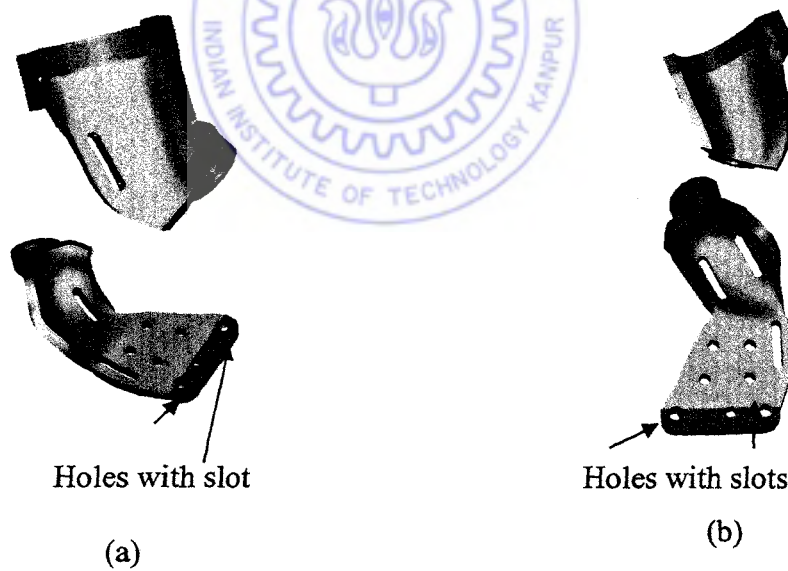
Two piece AFO having integrated arrangement for externally fixing double spherical ball & socket joint (a) AFO for right clubfoot (b) AFO for left clubfoot
